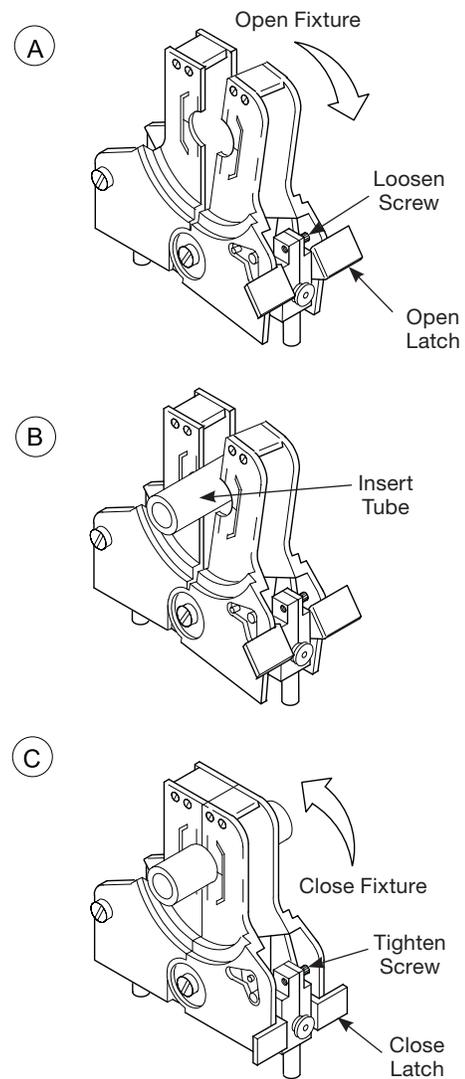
Aligning the Tubing in the Series 8 Micro Weld Head Fixture
